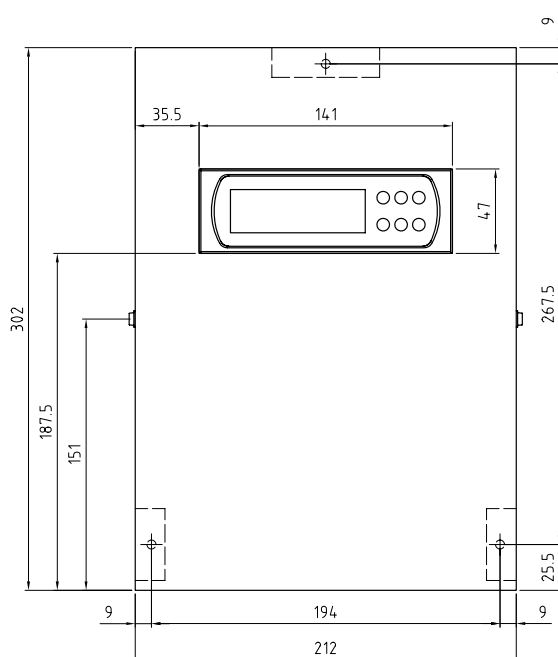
Dimensions of the wall-mounted heat pump controller (heating)
